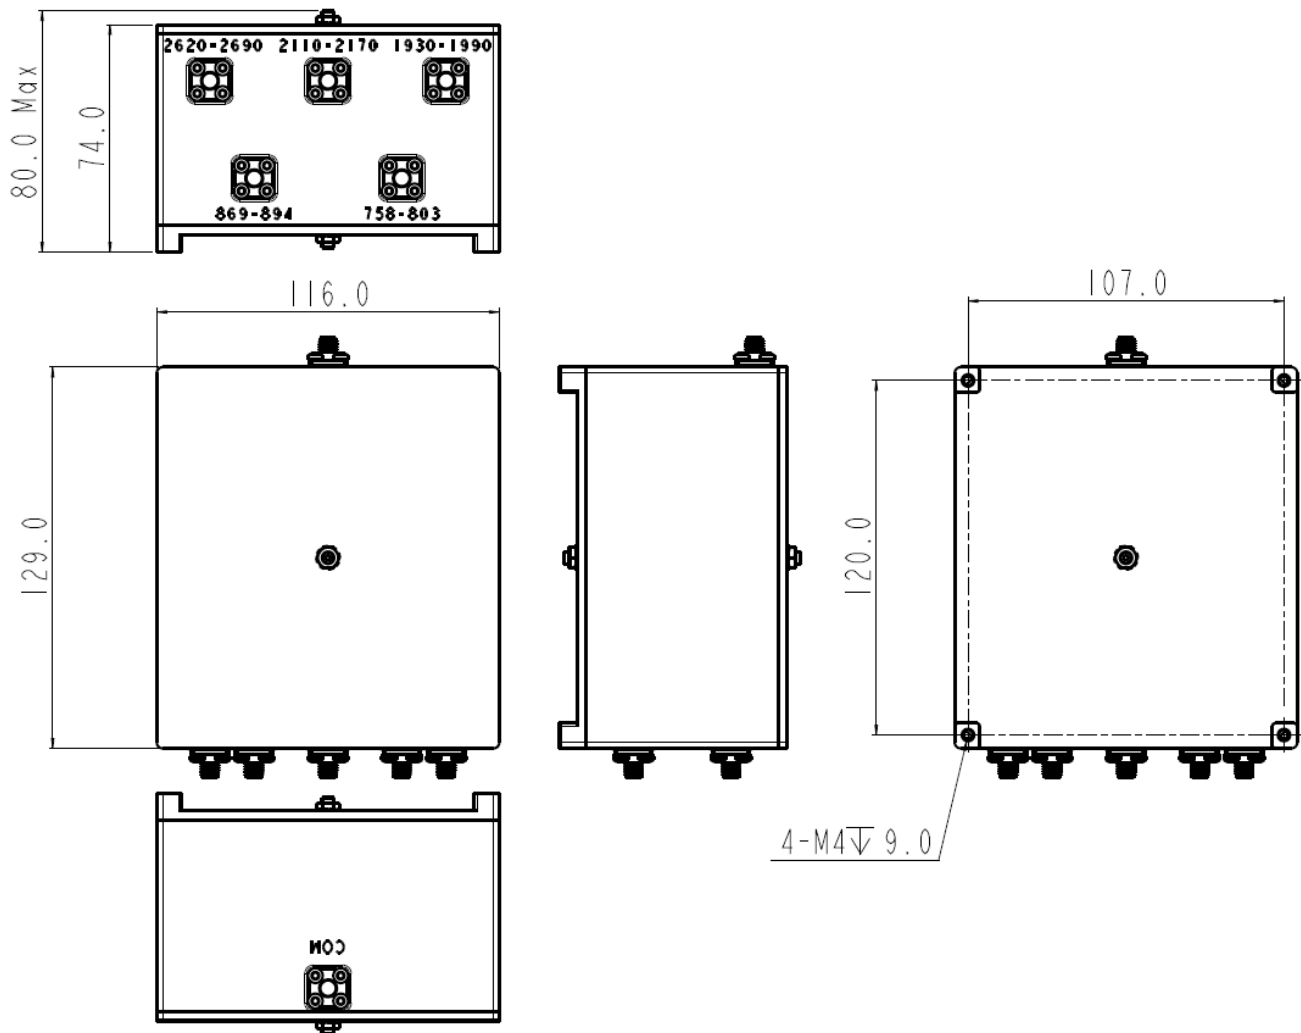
JX-CC5-758M2690M-75NS2 front panel layout
